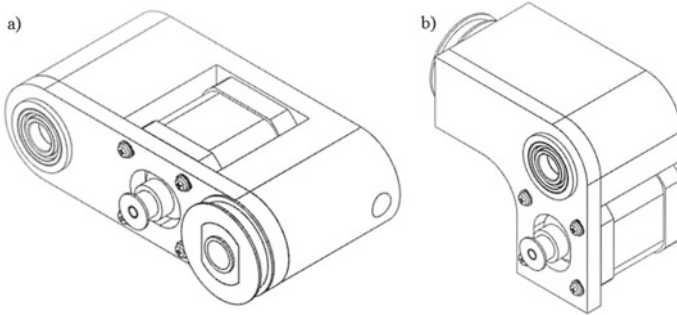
a Joint with parallel axles; b joint with perpendicular axles
